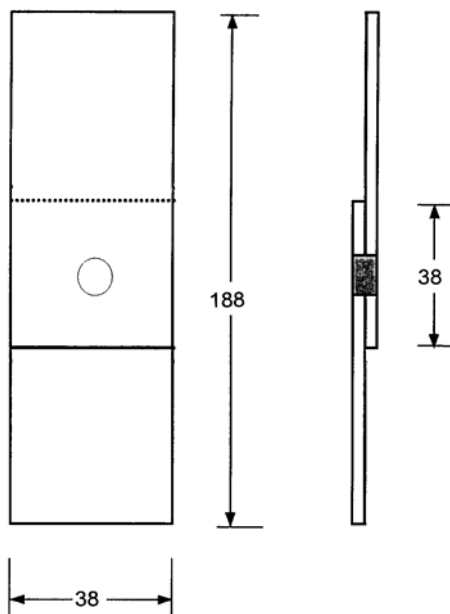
Spot-Welded Lap Shear Test Specimen
